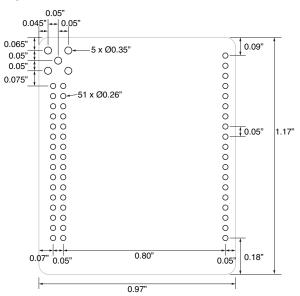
EVM-xxx-RC PCB Layout Dimensions
